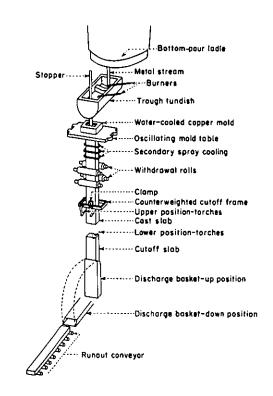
TYPICAL VERTICAL CONTINUOUS-CASTING MACHINE FOR STEEL
